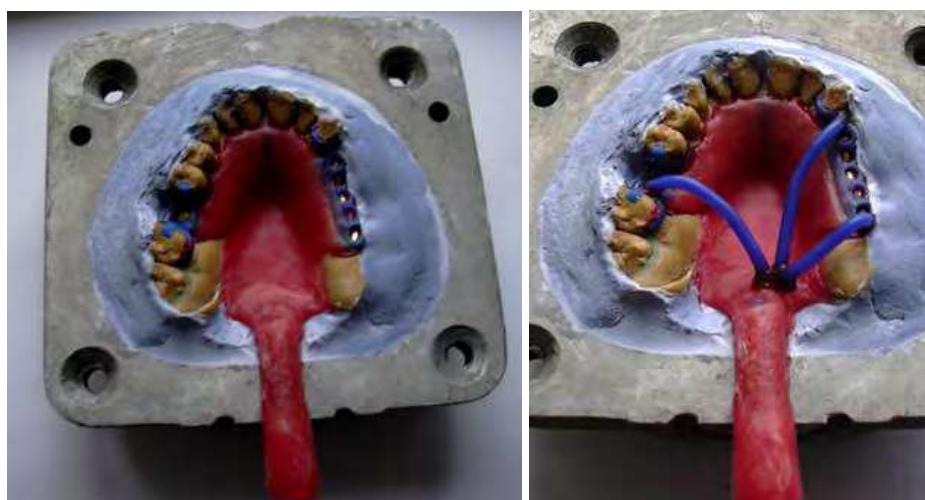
Wrapping the wax pattern frame of the removable partial denture
